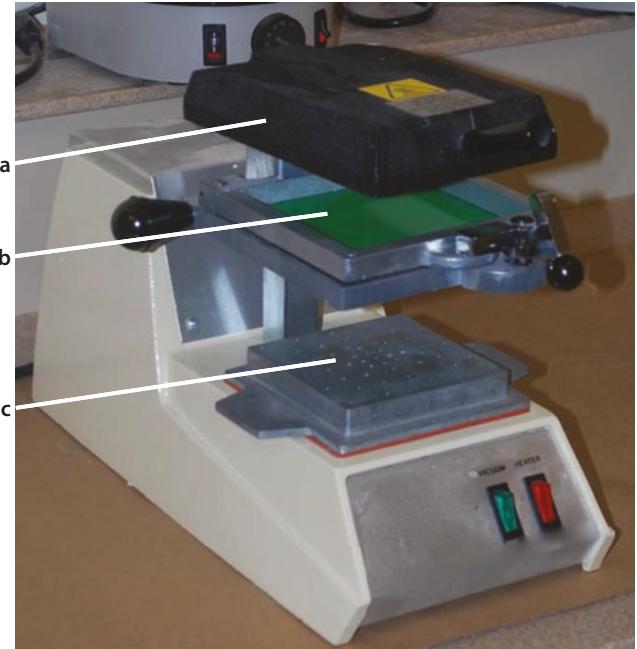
Typical vacuum forming machine. a Heating element, b sheet of EVA secured in the holding component, c vacuum stage
